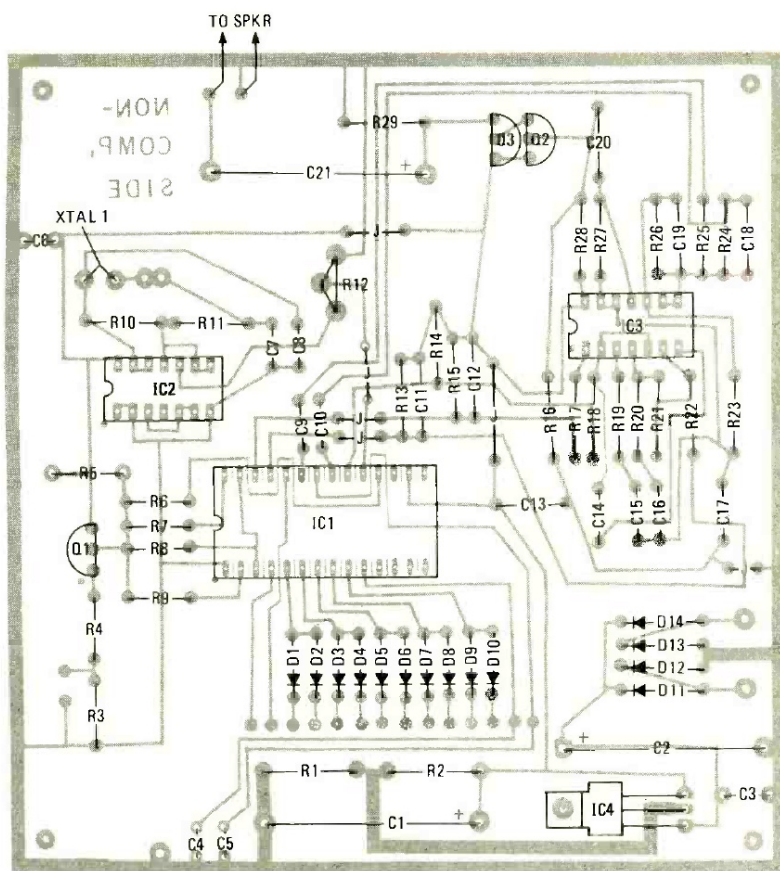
COMPONENT LAYOUT showing positions of all on-board parts. Switches, speaker and power transformer are mounted in the case.
